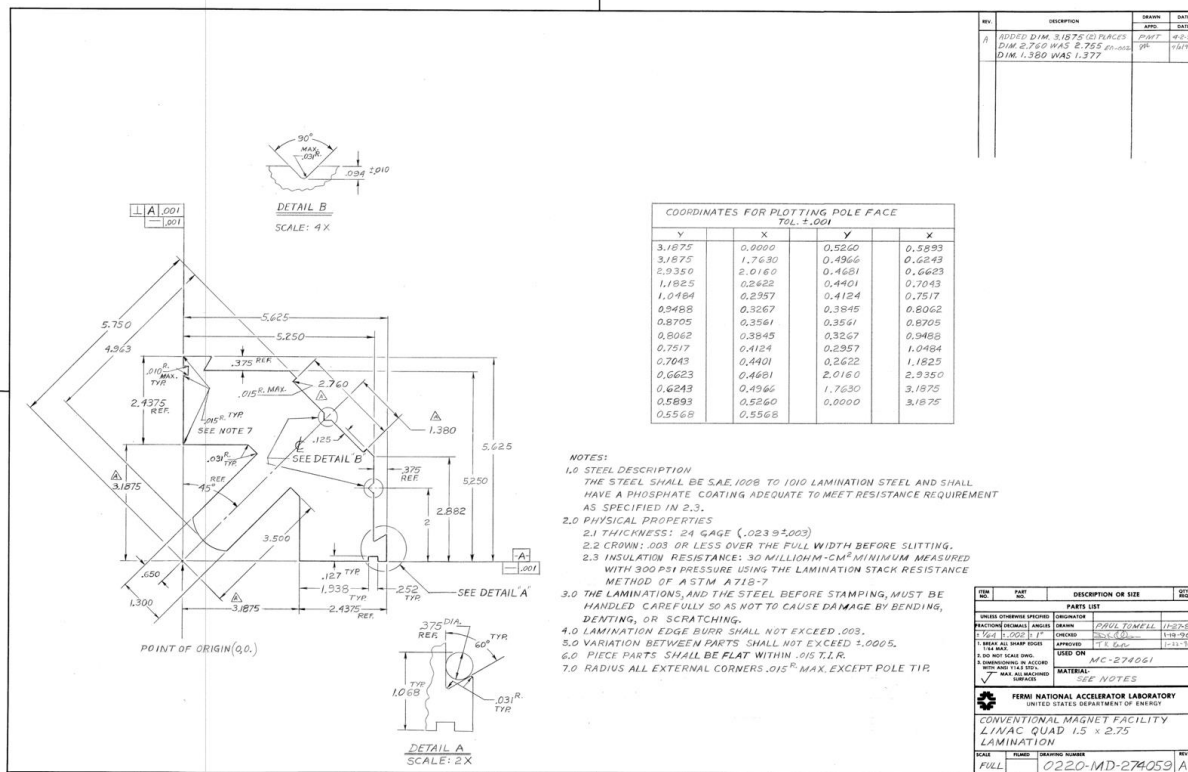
Technical drawing of a single pole, with materials and construction specifications.
